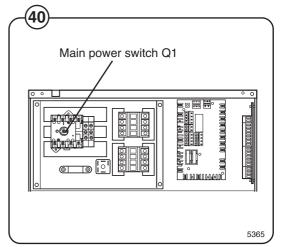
Inspect the power supply (230 V) at the main power switch Q1 on the machine.
